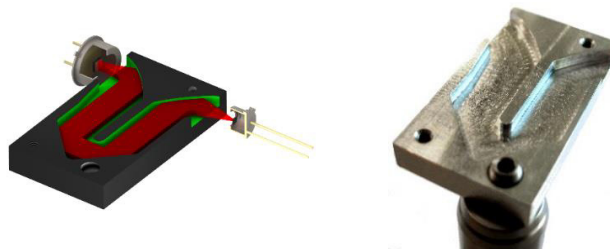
(left) Schematic view of the optical waveguide of the sensor with a designed optical path length of 7.6 cm. (right) Picture of the final measurement cell fabricated in aluminum using a CNC milling machine. The quality of the surfaces can be further enhanced using other fabrication methods.
